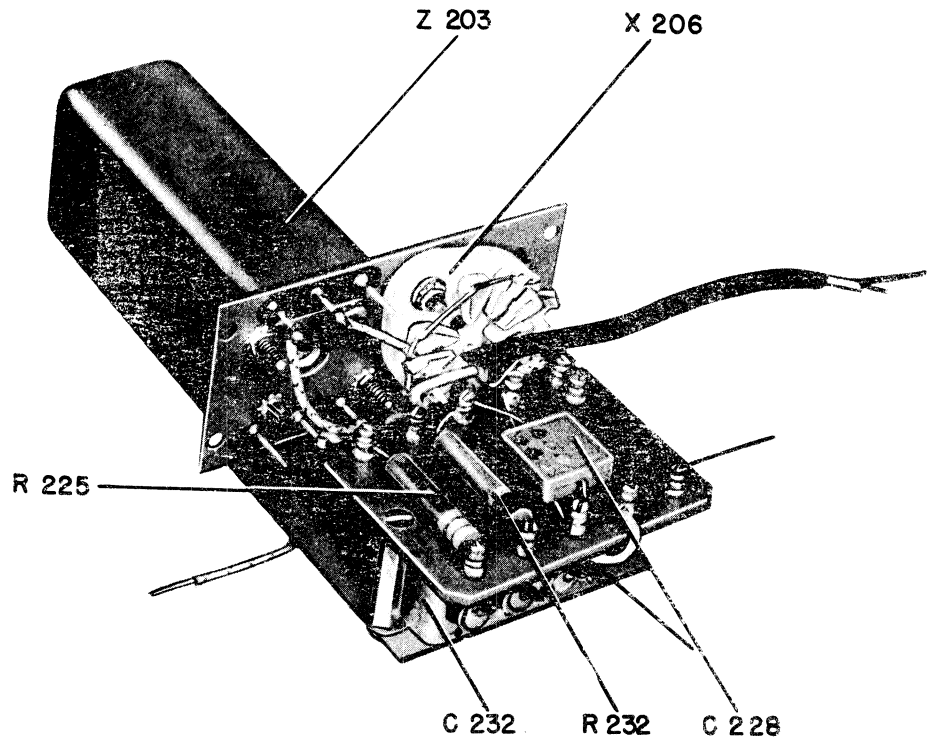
Receiver 3rd I-F Assembly — Bottom View
